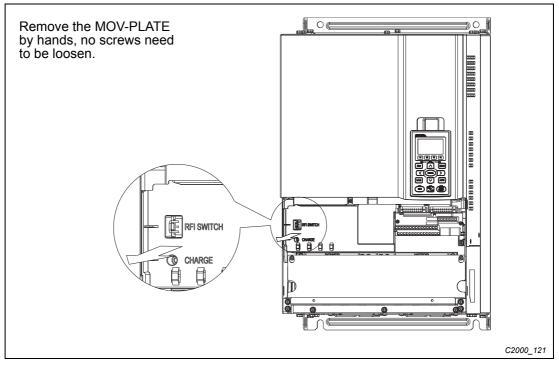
Removal of the RFI jumper (frame size D-H)
